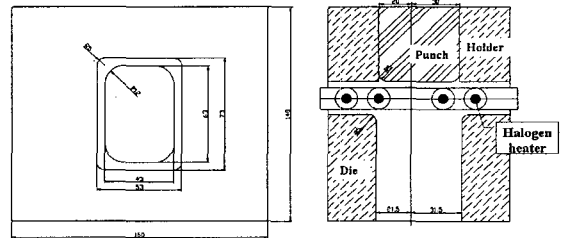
Tool set and dimension for square cup deep drawing of AZ31 alloy sheet
